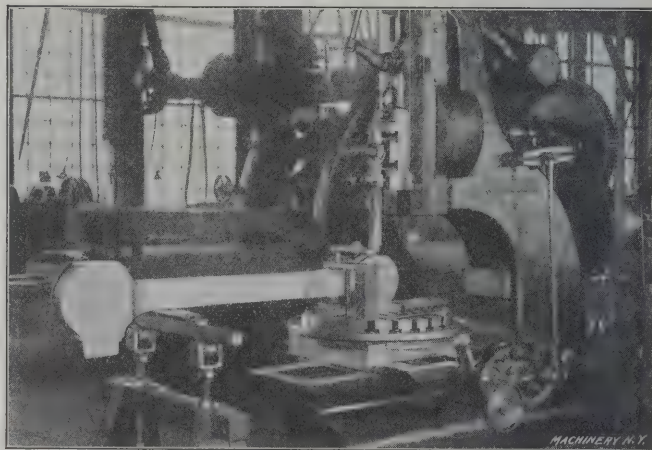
Machining the Knuckle-joint Slot for the End Rod in the Slotting Machine
